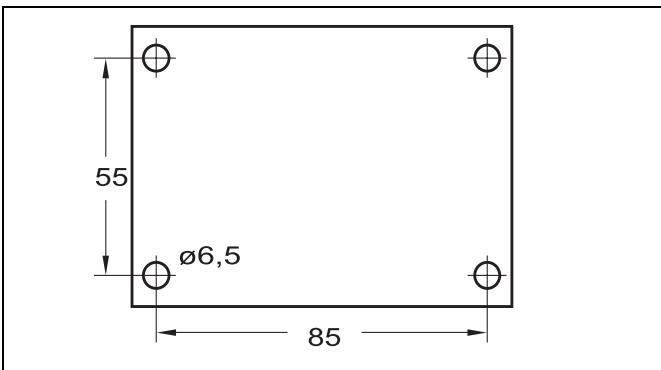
Hole pattern for the stand for U 4814 circulating pump
